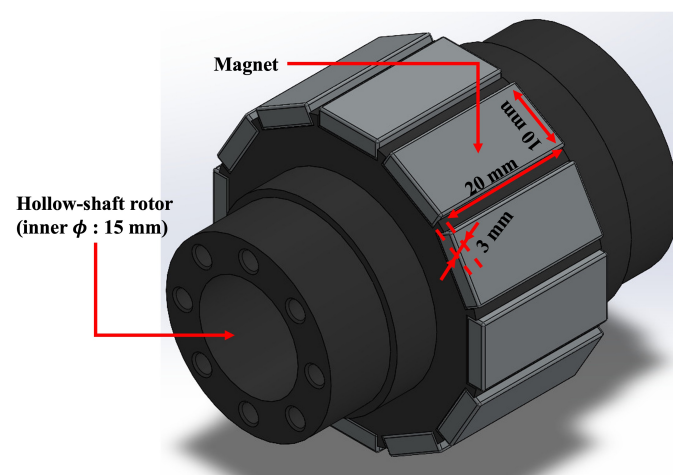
A 3D CAD model of the hollow-shaft rotor (inner diameter: 15 mm) with twelve $20 \times 10 \times 3$ mm NdFeB permanent magnets.
